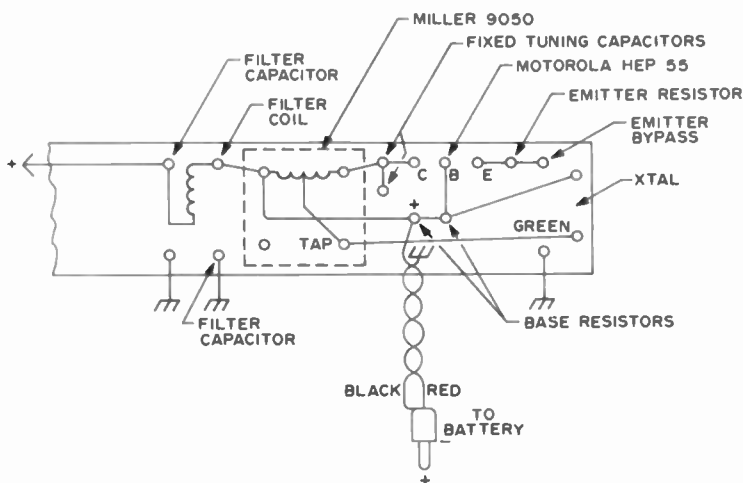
Oscillator wiring diagram (lead side of strip).
